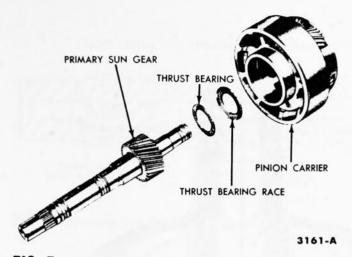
Primary Sun Gear Rear Thrust Bearing
